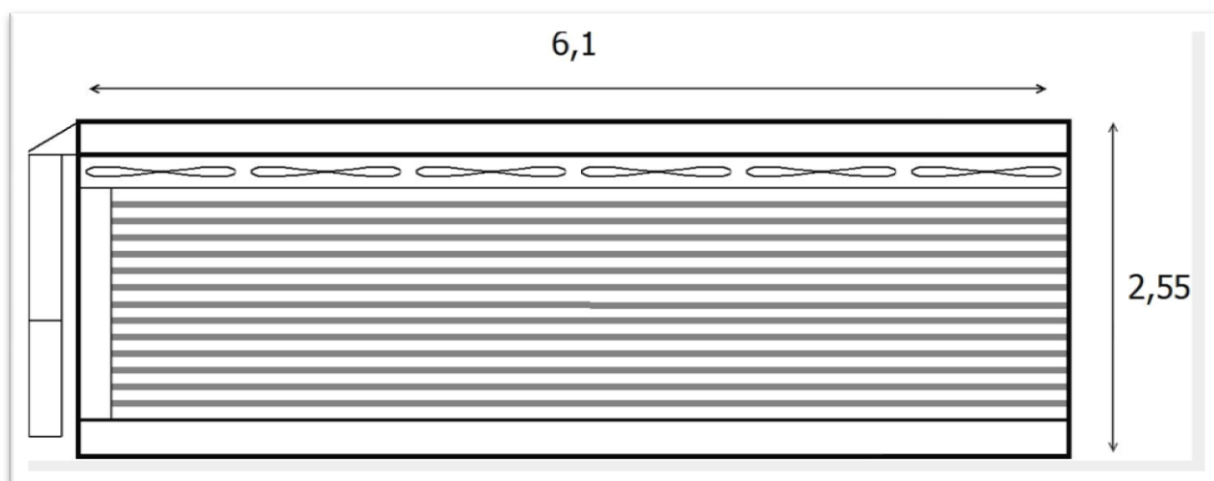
Side view of the cooling module and measures (Source: Own design)
